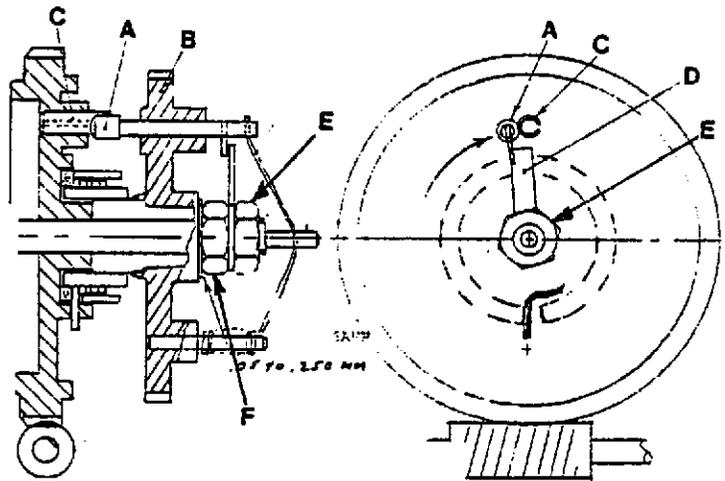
FEED SPROCKET CLUTCH ADJUSTMENT
